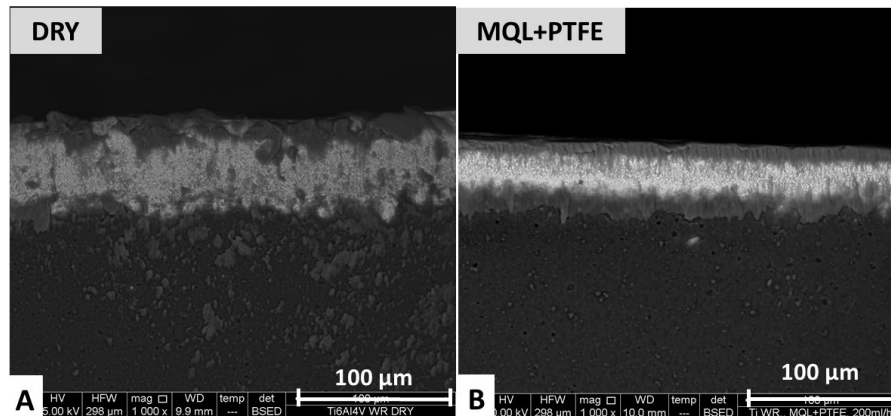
Tool flank face after 15 minutes of turning under: (A) dry cutting, and (B) SL-assisted MQL.
